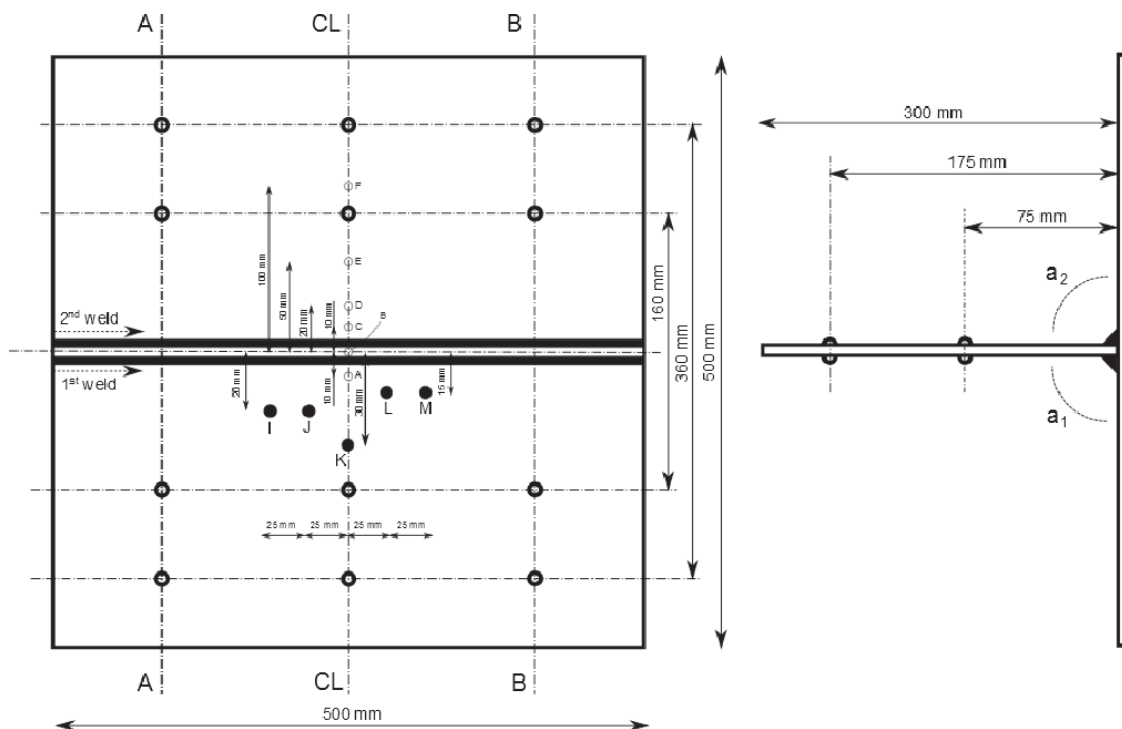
Welding experiment of a “T” joint assembly and position of thermocouples (I-M), residual stress measurements (A-F) and distortion measurements points (sections A-A, CL-CL and B-B)
